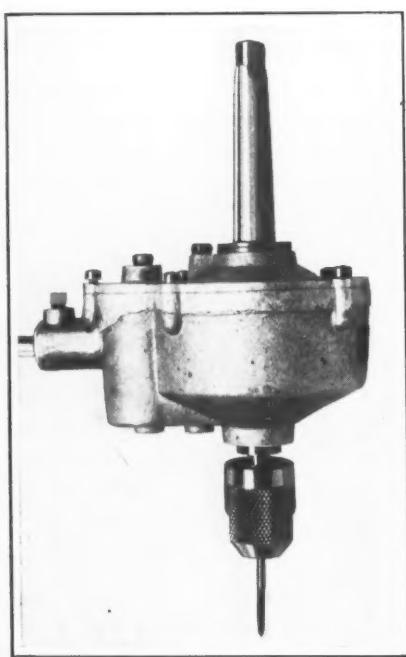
Tapping Attachment made by the Eastern Tube & Tool Co., Inc.
